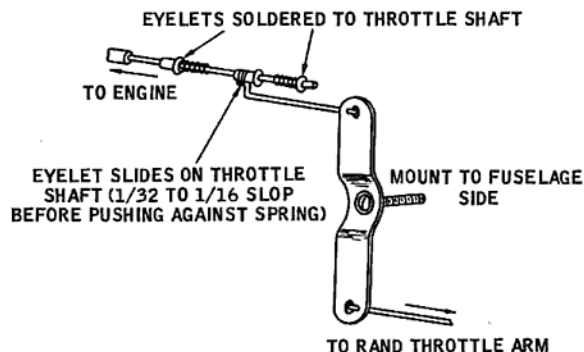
THROTTLE REVERSE BELLCRANK, "SLOP" CLEARANCE & LIMIT SPRINGS
